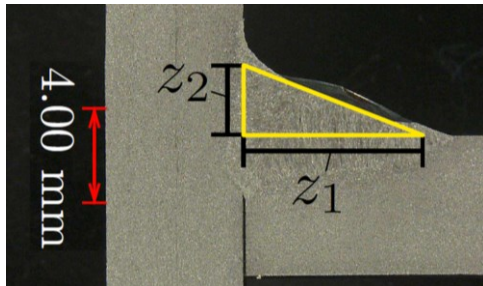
Weld seam leg definition in a fillet weld seam cross section
